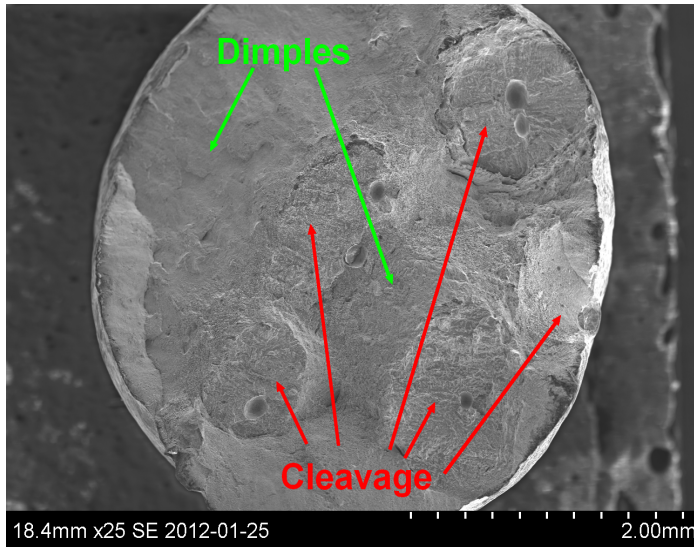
Fracture section of 5Ni\_weld at 0°C
